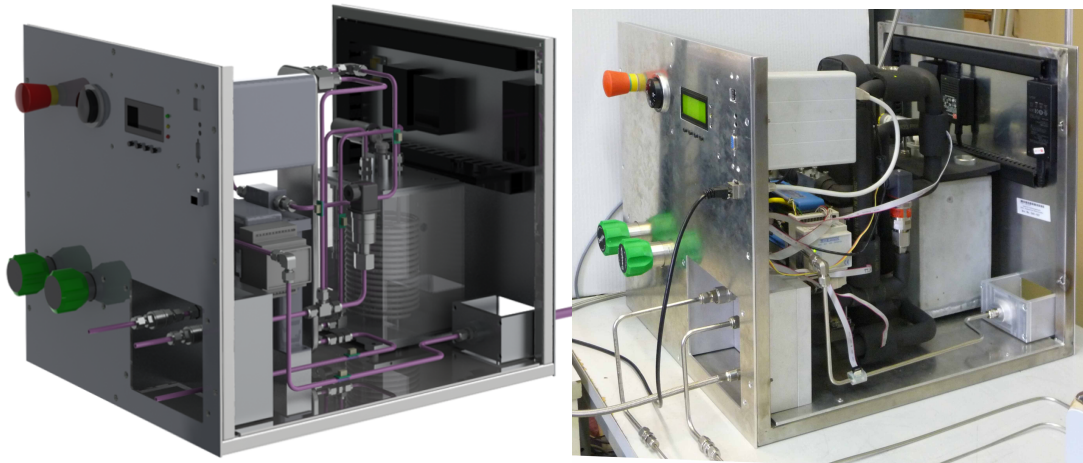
The 3D CAD design of the open CO₂ cooling plant and the fully assembled cooling box.
